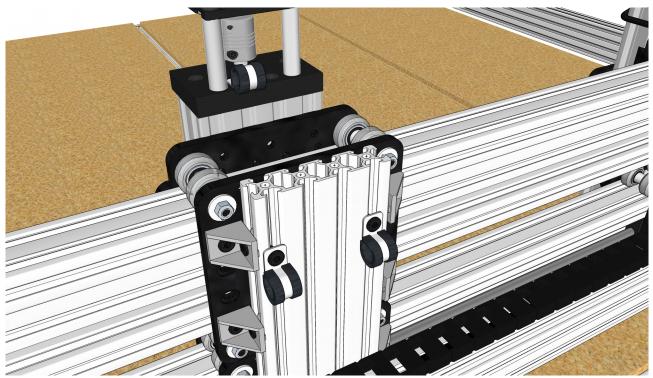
Install Flexible Tubing Clamps on the additional Z-axis backbones
